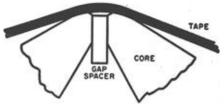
Enlarged drawing showing how improper finishing will produce a large difference between mechanical and effective gap.
